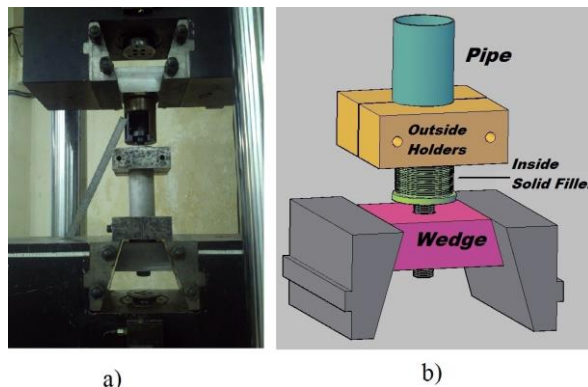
a) DARTEC 9600 testing machine with the installed fixture
